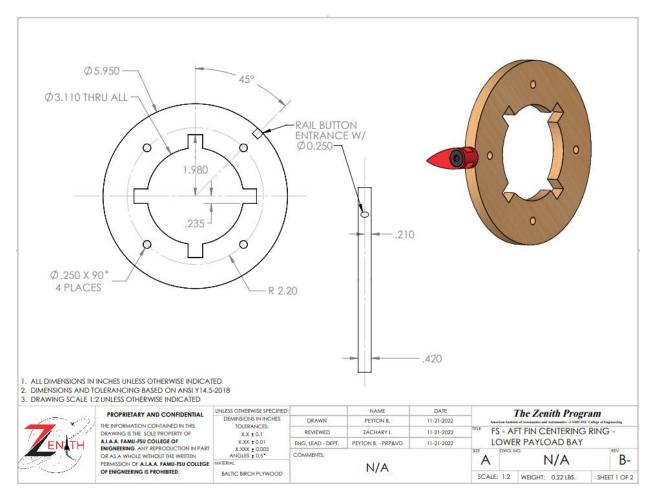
Aft Fin Centering Ring CAD Drawing
